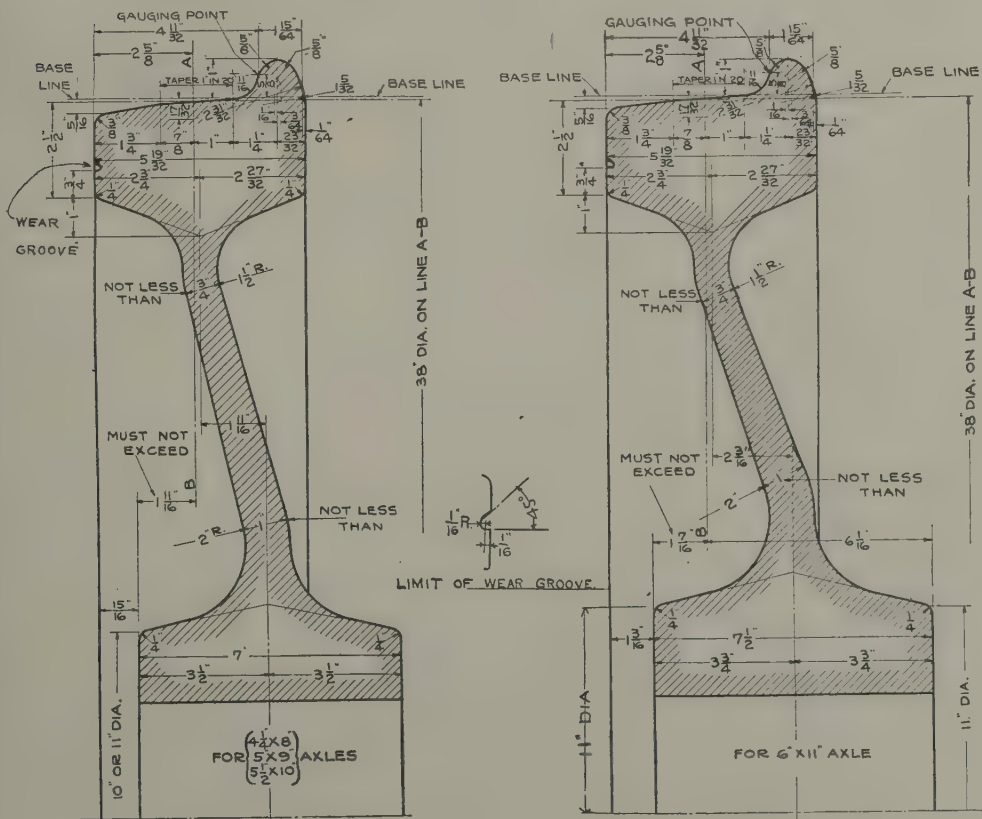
Standard 38 in. Wrought Steel Wheel. (M. C. B. Sheet 25B.)
